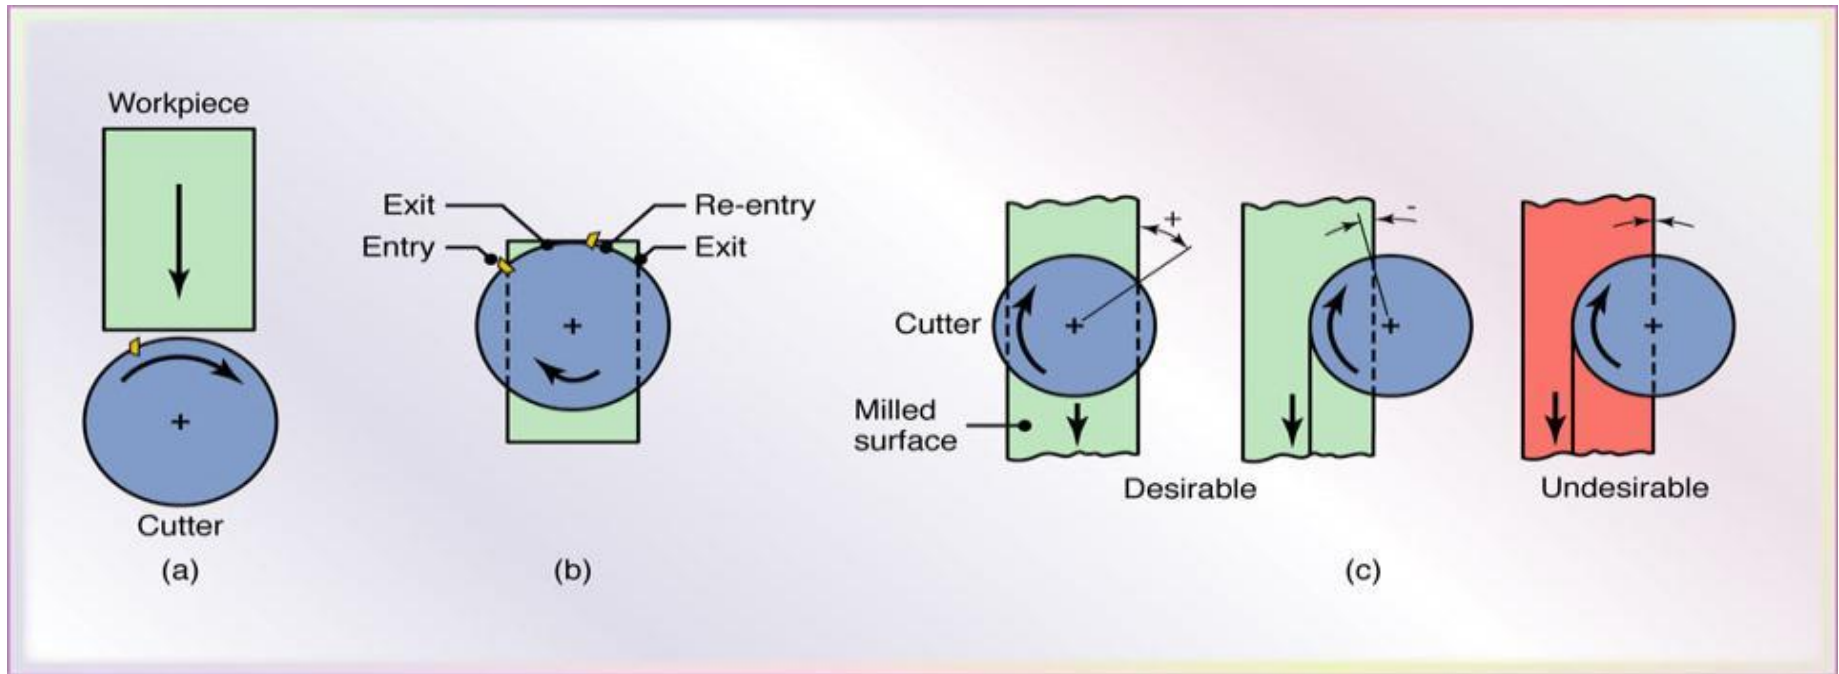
(a) Relative position of the cutter and insert as it first engages the work piece in face milling. (b) Insert positions towards the end of cut. (c) Examples of exit angles of insert, showing desirable (positive or negative angle) and undesirable (zero angle) positions. In all figures, the cutter spindle is perpendicular to the page and rotates clockwise.
